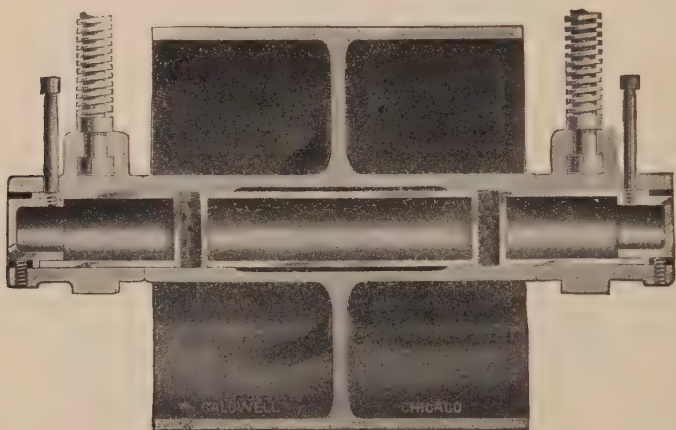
Loose Foot Pulley on Hollow Shaft with Internal Lubrication.
